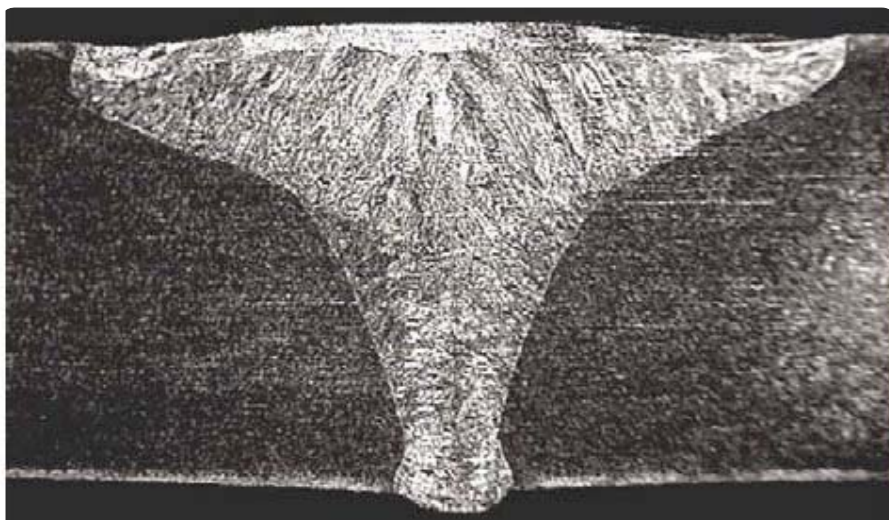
Macrograph of K-TIG weld in 10 mm thick Inconel 617 test plate
